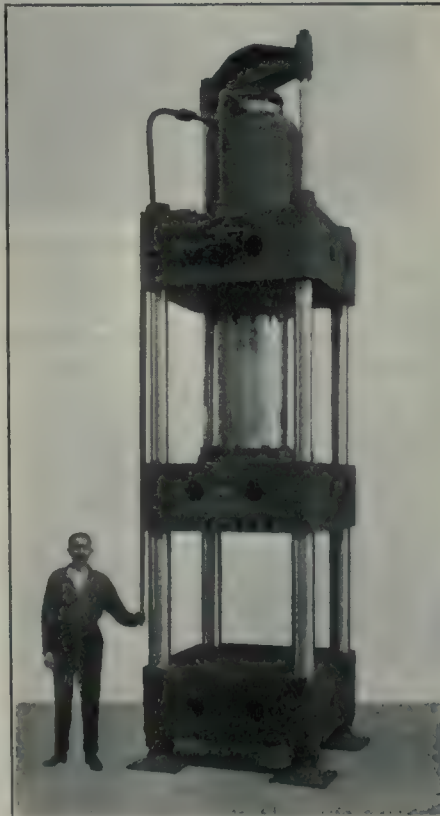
HYDRAULIC PROJECTILE PRESS.
